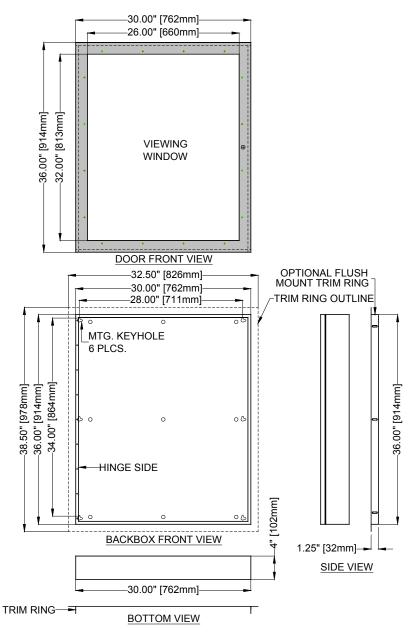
Door Assembly and Back Box Dimensions, P/N 10-2693
